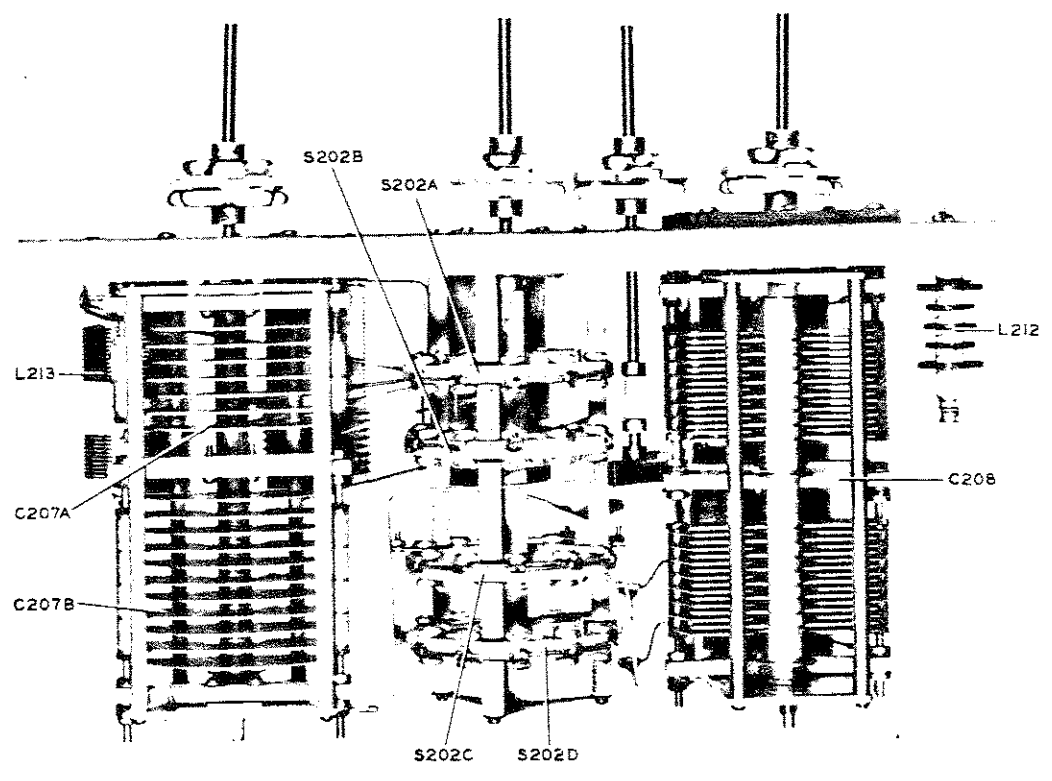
OUTPUT COIL & SWITCH ASSEMBLY, BOTTOM VIEW
